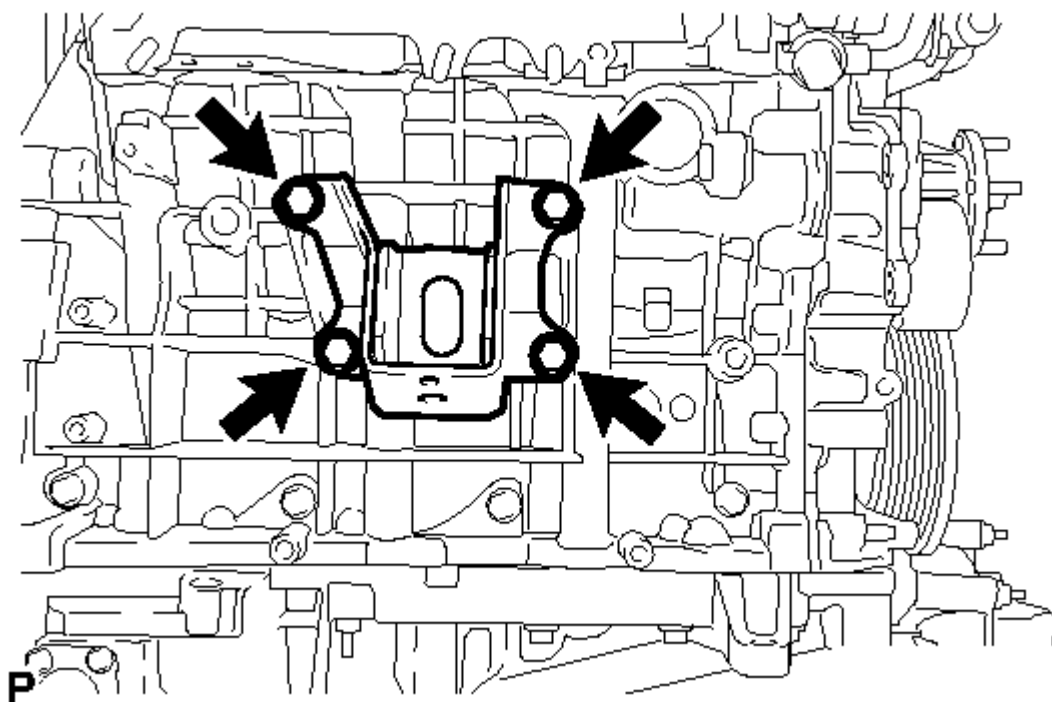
Identifying Front No. 1 Engine Mounting Bracket RH And Bolts
